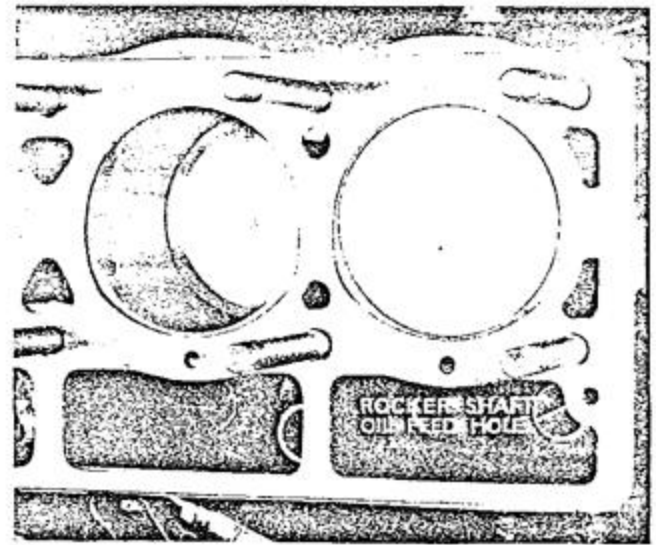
Showing the correct fitting position for the cylinder head gasket (Eng. Nos. V.1—V.29707E)
